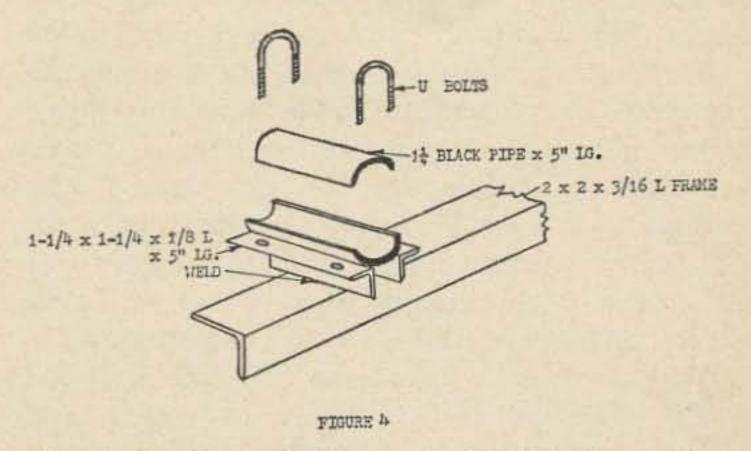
The boom is fastened with U bolts to the angle framework of the tilting section.
